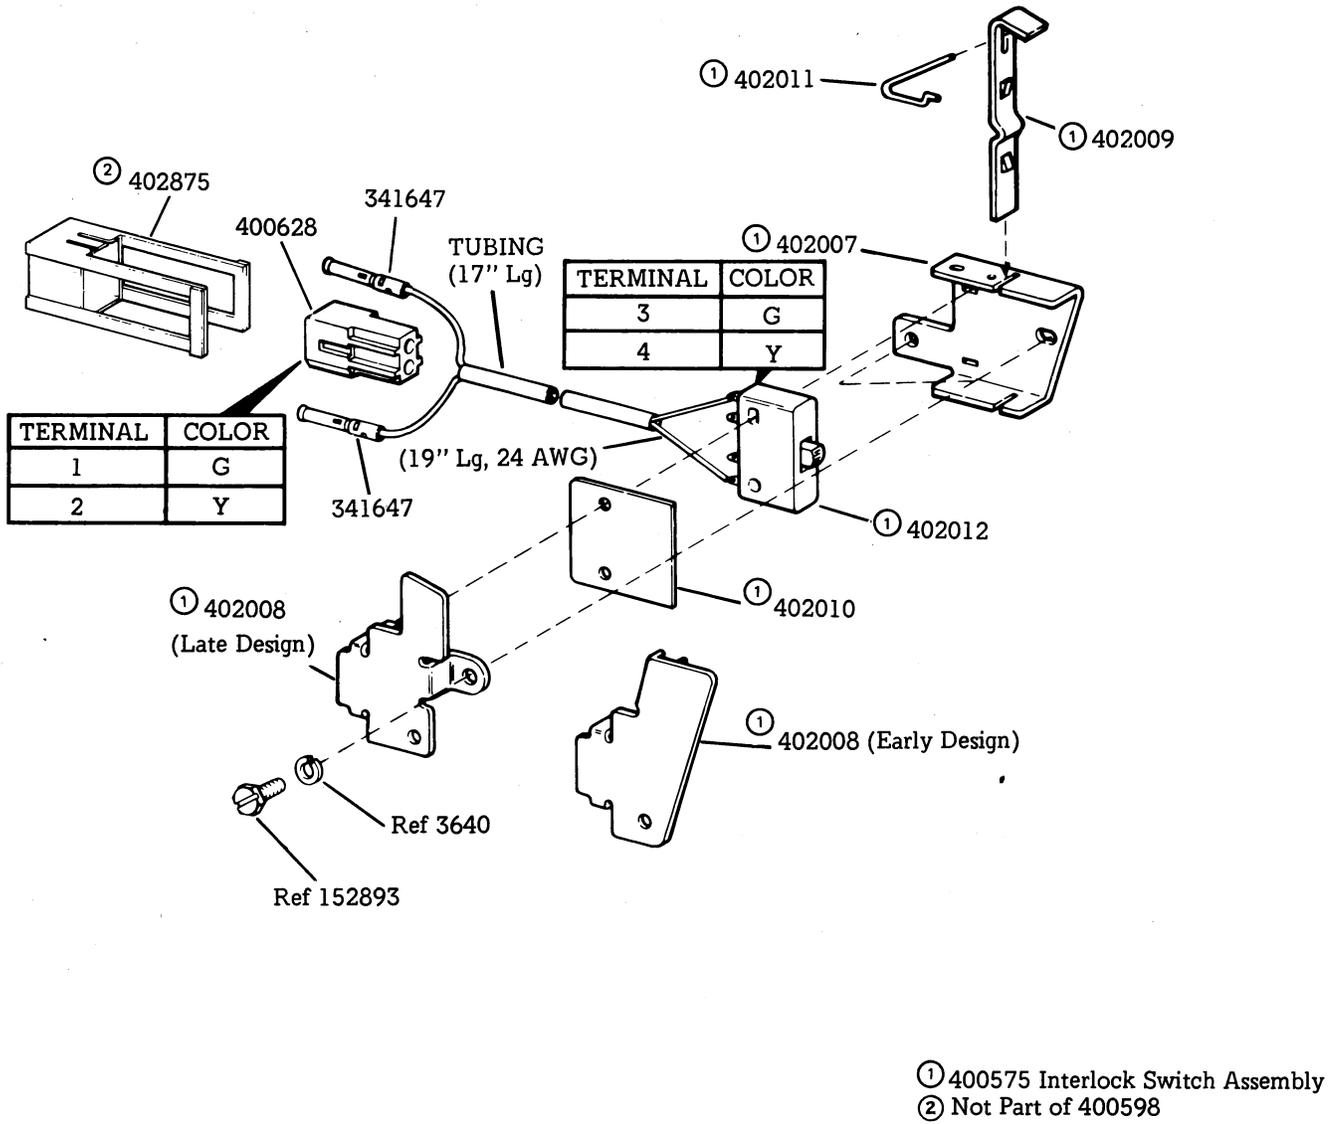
Interlock Cable Assembly for Friction Feed Printer Cabinet
